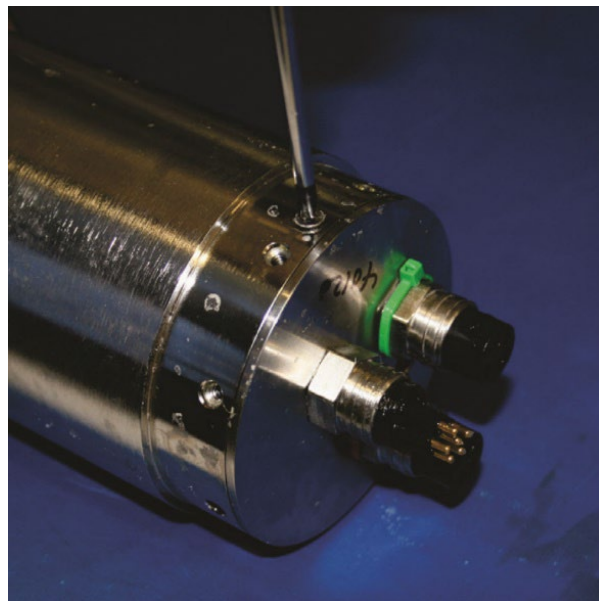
Removing the Phillips Head Screws from the Electronics Bottle
